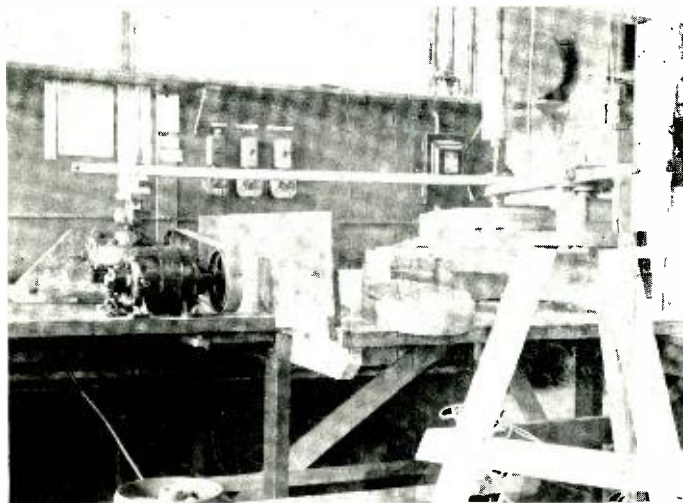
Machine for grinding and polishing glass covers for 31-inch TCR tube.
